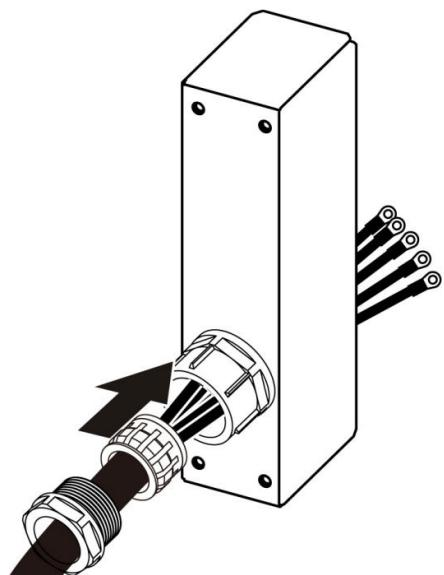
Assembling the 62050P Input Terminal Safety Cover - 1
